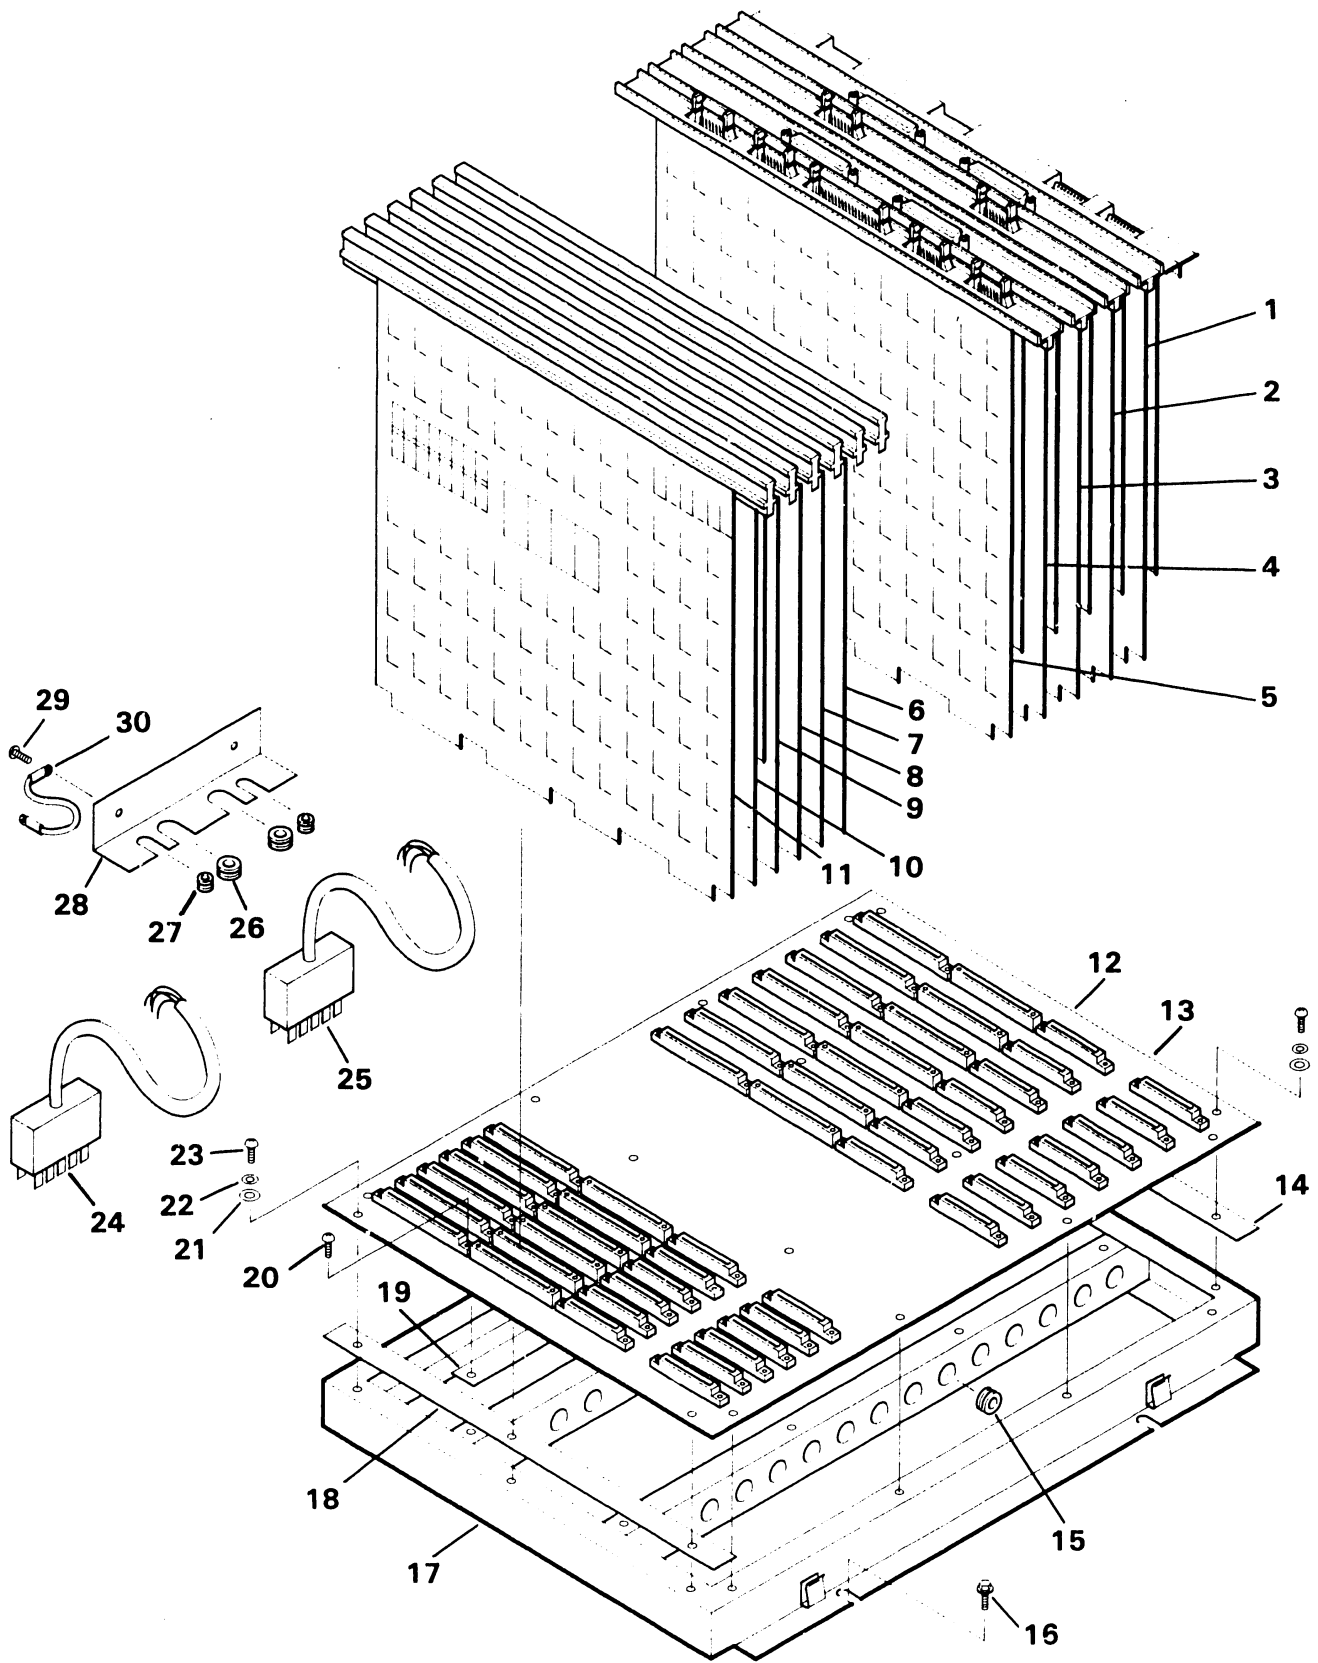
CHASSIS & TRANSFORMER ASSEMBLY
